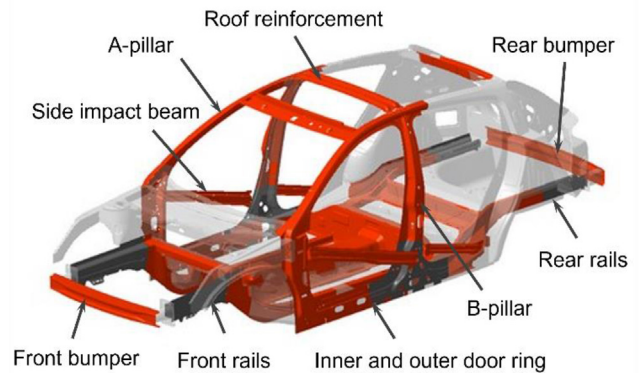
Typical application of hot-stamped components in a passenger car (base image from Ref. [28]). Red labels a harder hot-stamping steel and black indicates a softer hot-stamping steel.
